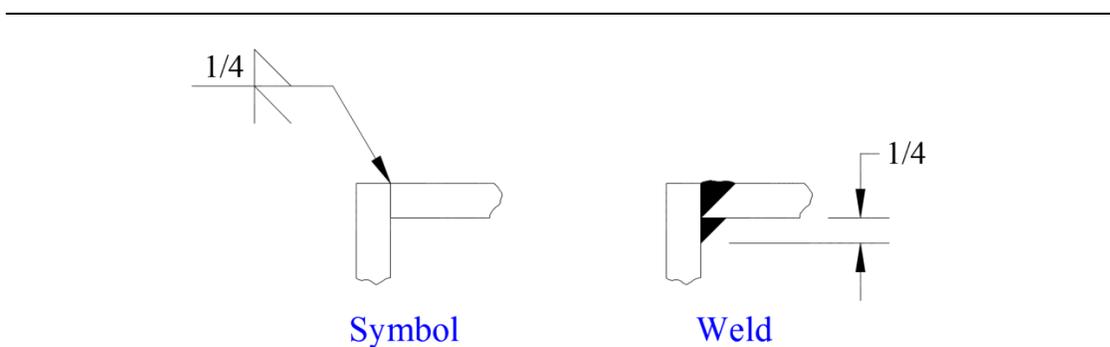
Combination corner weld with single bevel and fillet welds
